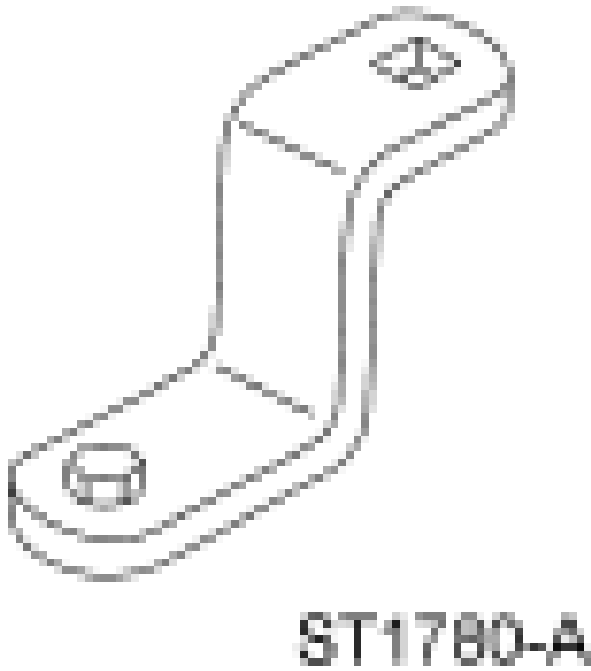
Holding Crankshaft Pulley Using Special Tool
